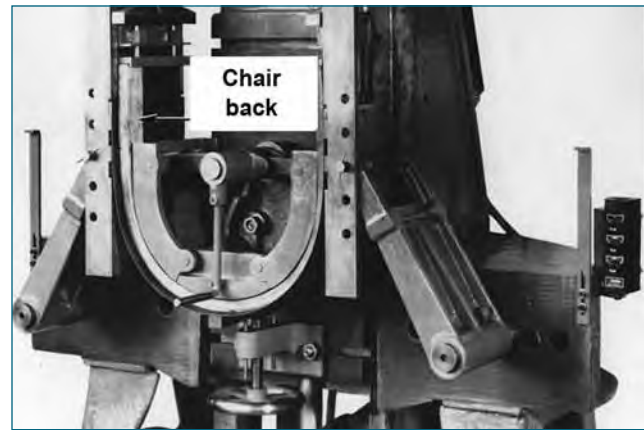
Chair back being bent through an arc of 180° in a bending machine.
